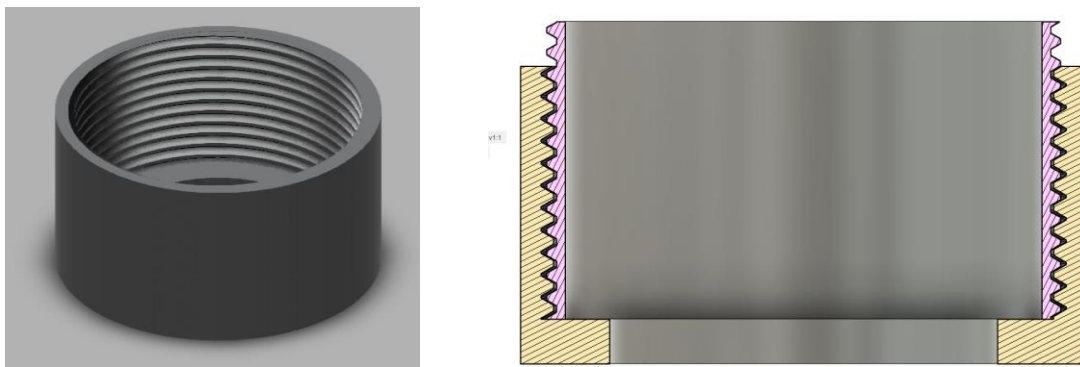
Motor Retainer (Isometric View (left) vs Sectioned View (right))
